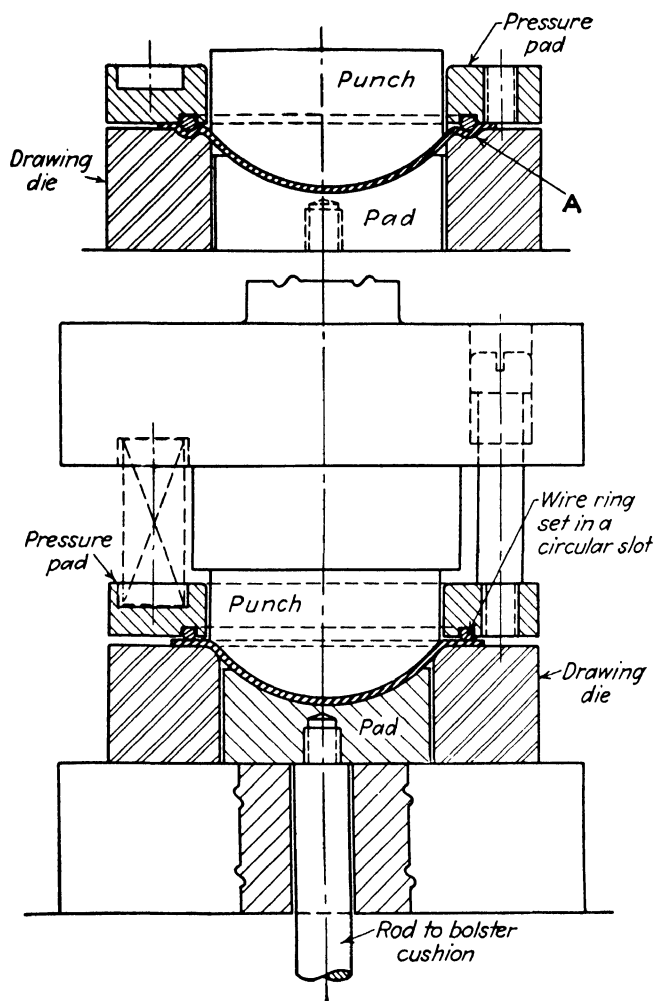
Sectional views through a die that draws a shallow spherical-segment shell from a steel blank.
